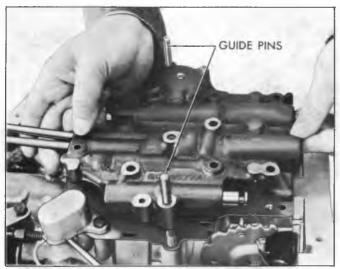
T-Installing Control Valve Assembly and Governor Pipes
